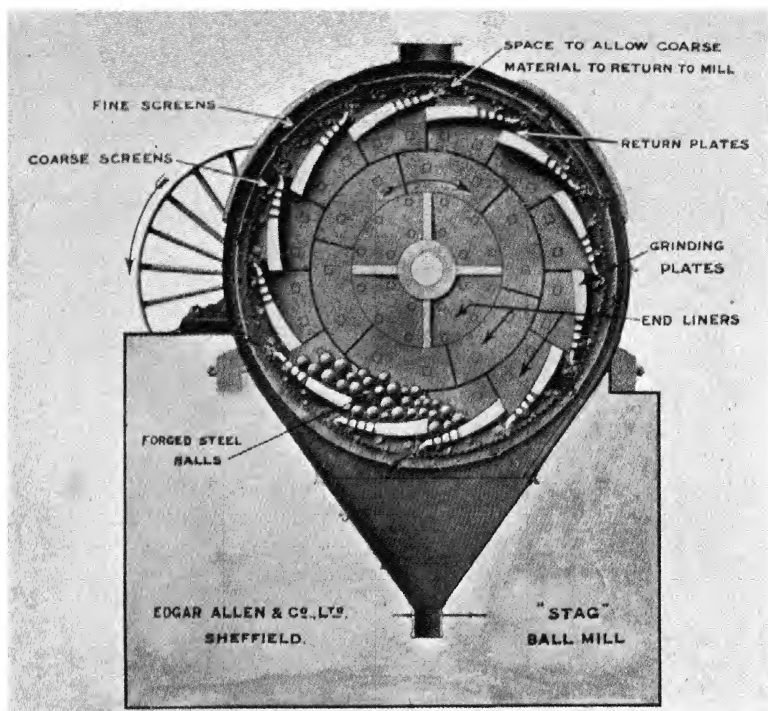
Ball mill by Edgar Allen & Co., Ltd.
